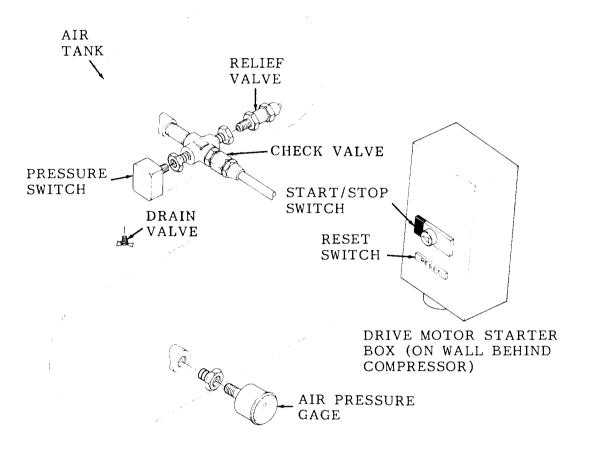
Air Compressor Drive Motor Control and Air Receiver Tank Pressure Gage.
